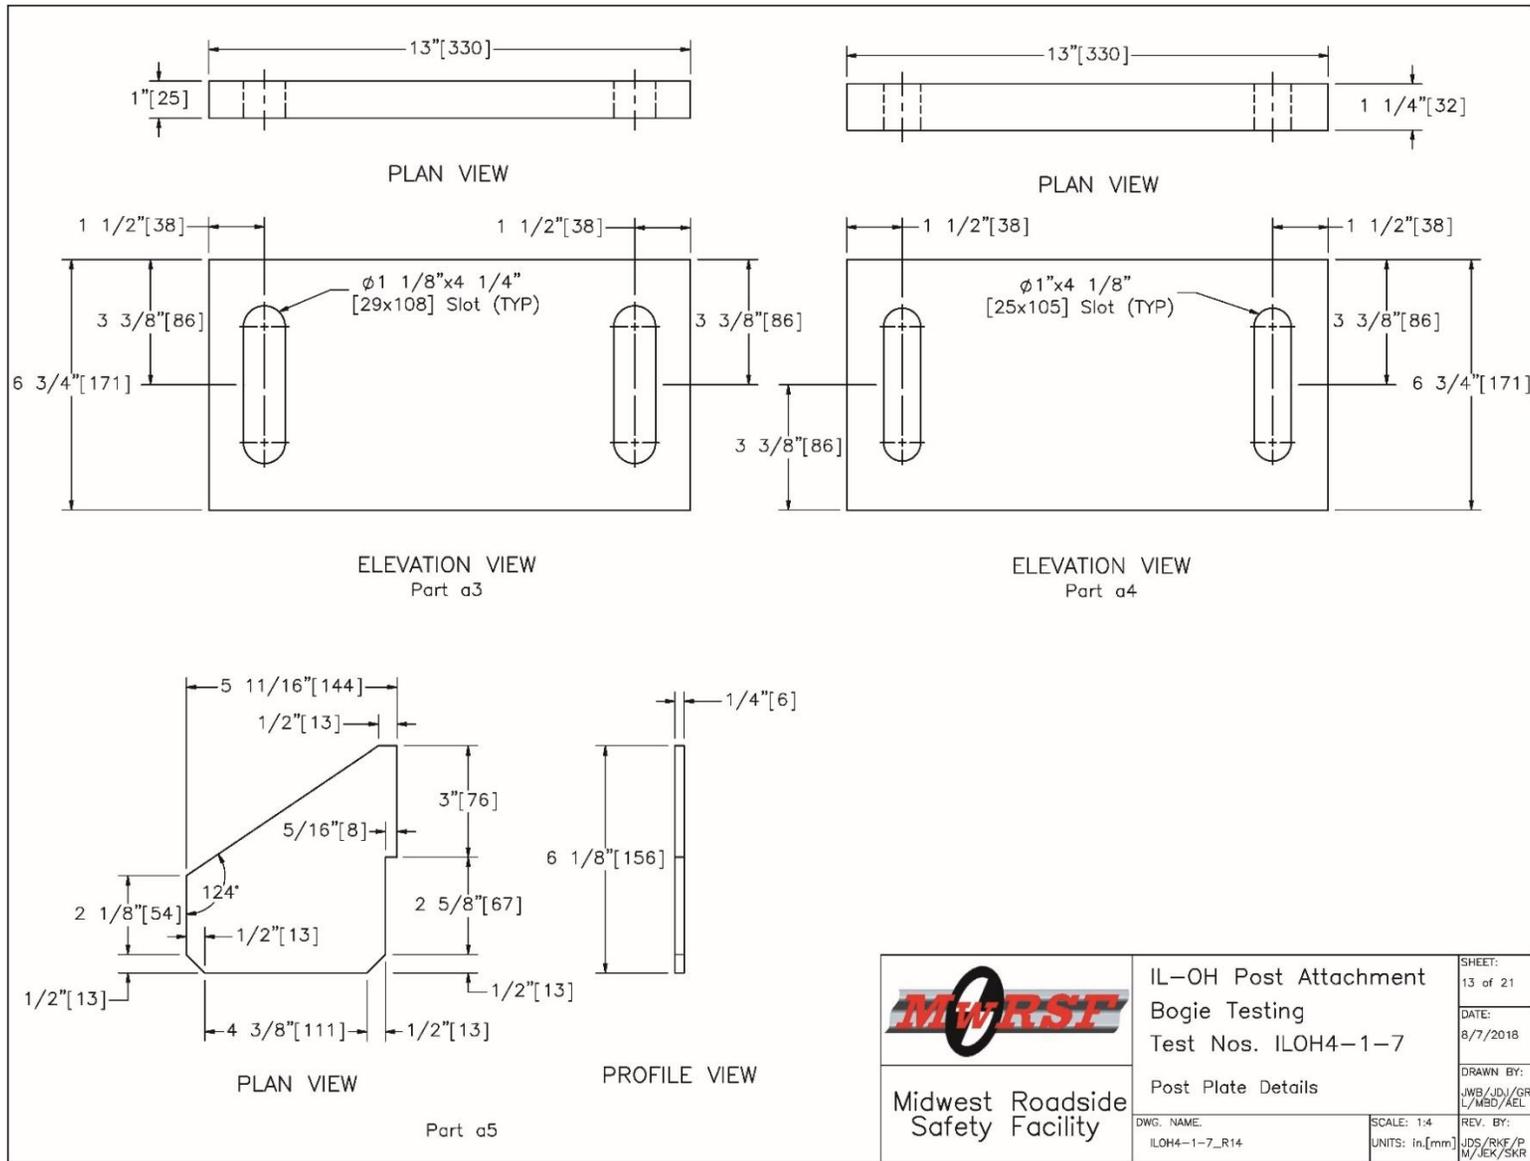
1-in. (25-mm) and 1¼-in. (32-mm) Post Plate and Gusset Details
